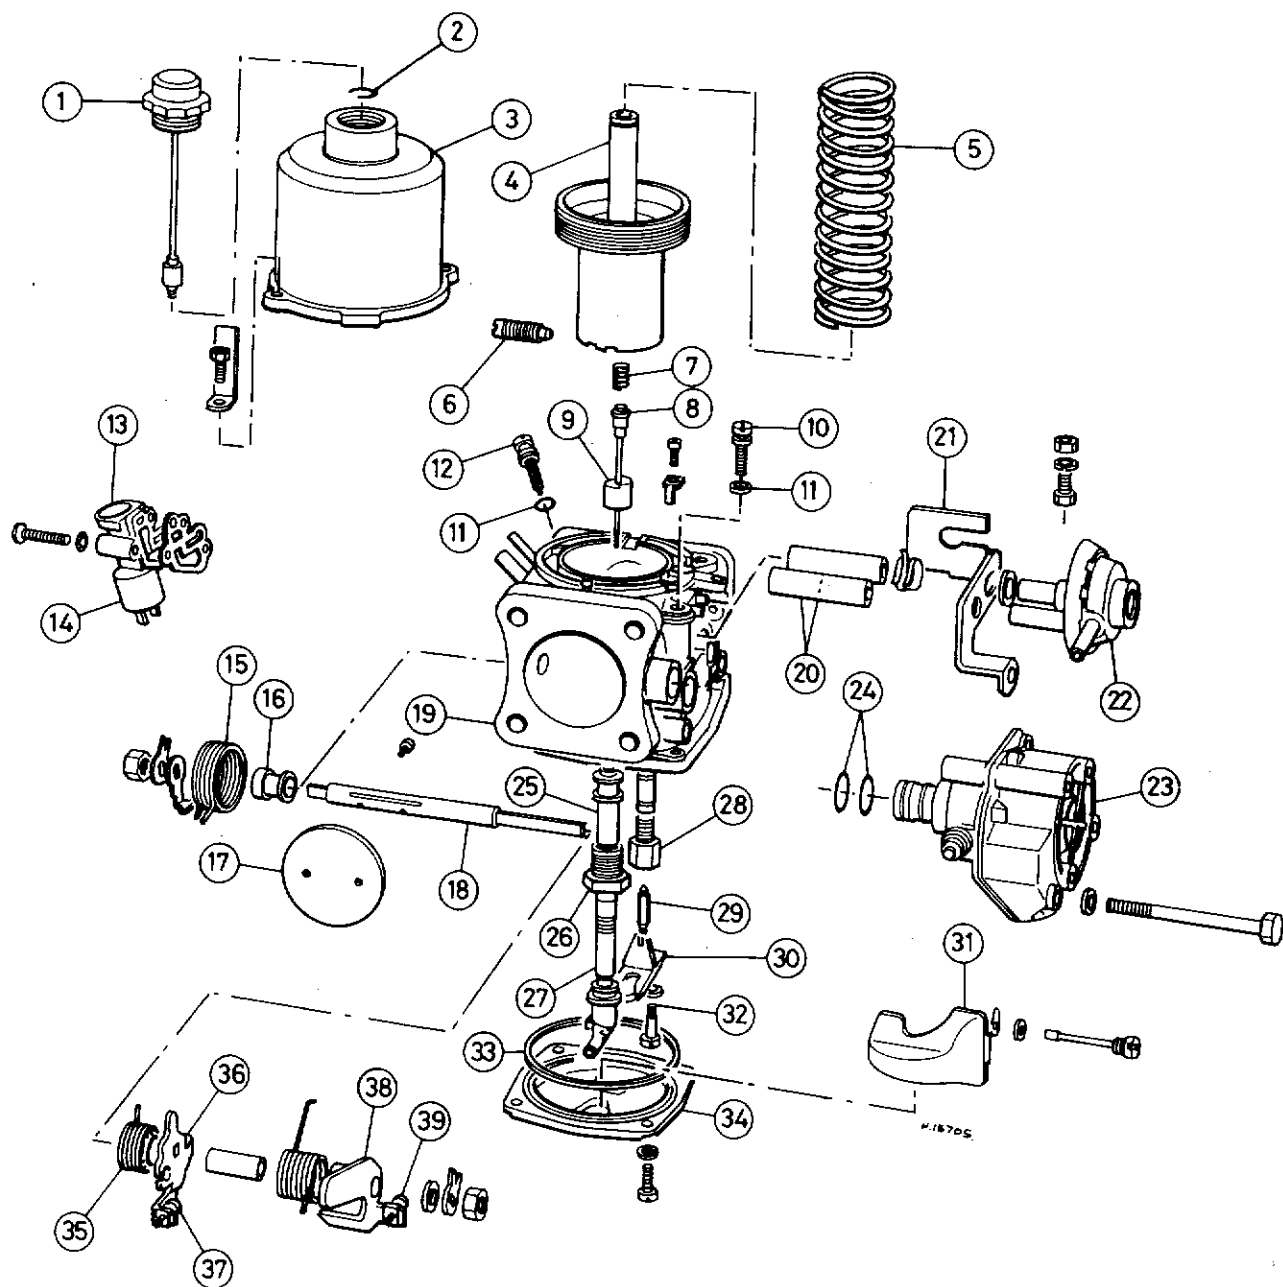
Exploded view of electronic type HIF carburettor (Sec 9)
